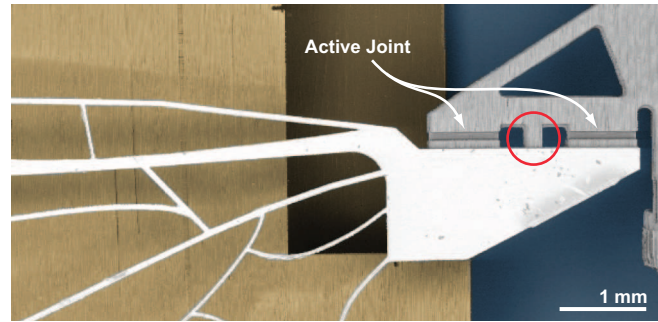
Mobee’s wing is mounted in series with an active joint. The circled strut mechanically constrains this joint to ensure precision single degree of freedom assembly. This strut is one of several removed by micromachining during release to enable Mobee’s three active degrees of freedom. Image presented in false color.
